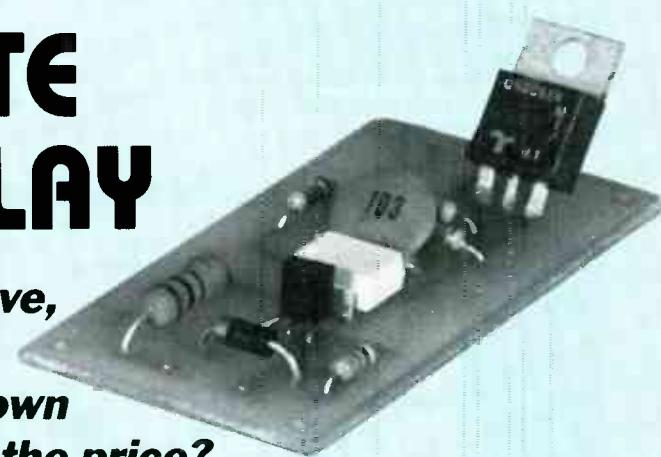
THE CURRENT VERSION of the PC board, shown here with all parts installed.
